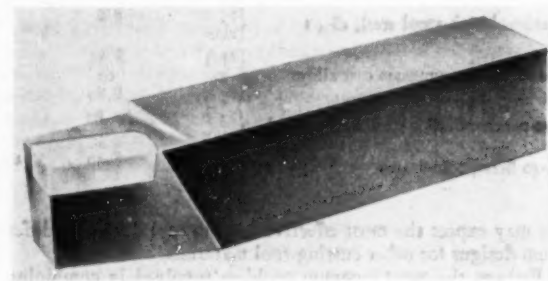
TYPICAL BRAZED CONSTRUCTION CARBIDE CUTTING TOOL
